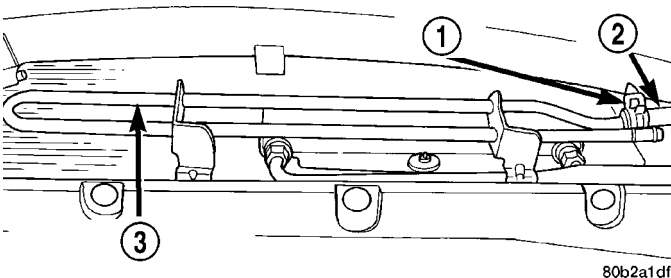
Upper Hose At Power Steering Fluid Cooler
